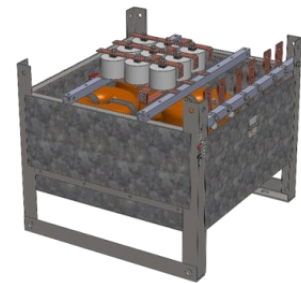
Air Cooled Integrated Panel (Shorter Capacitor Jumper Cables)
